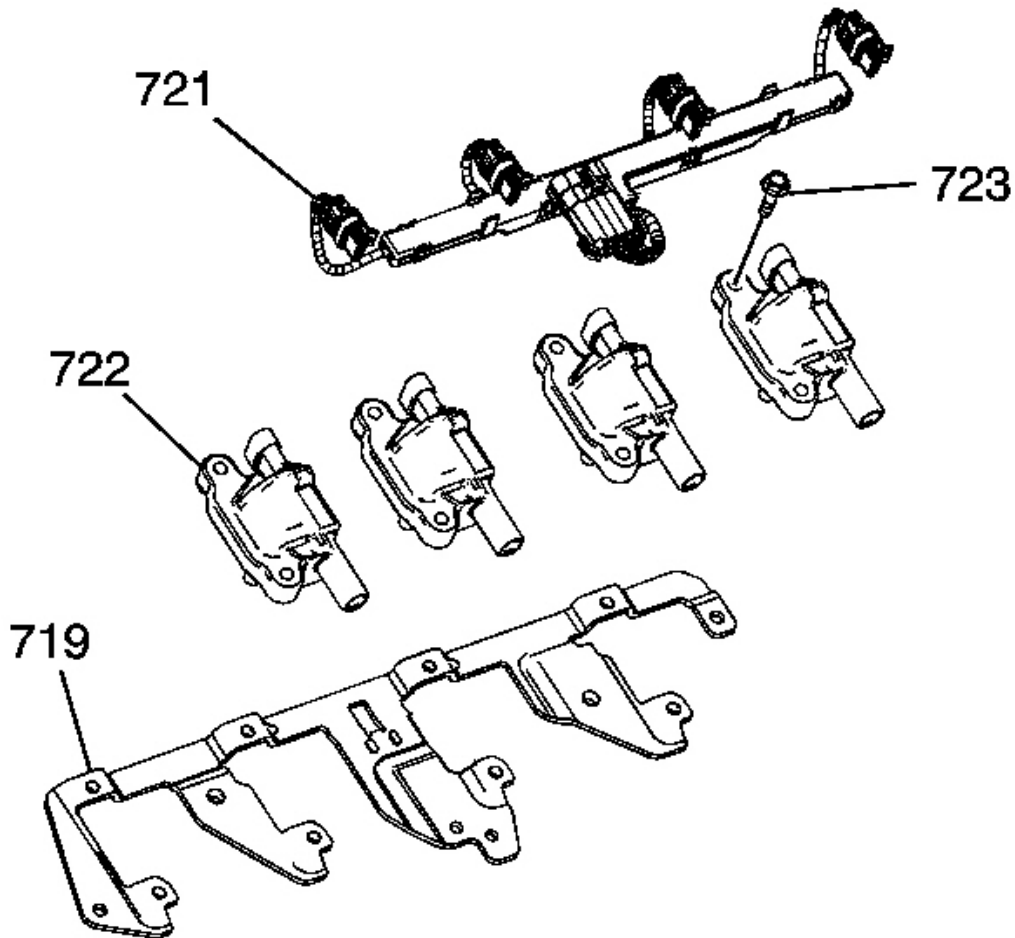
View Of Bracket, Bolts, Coils & Wire Harness
